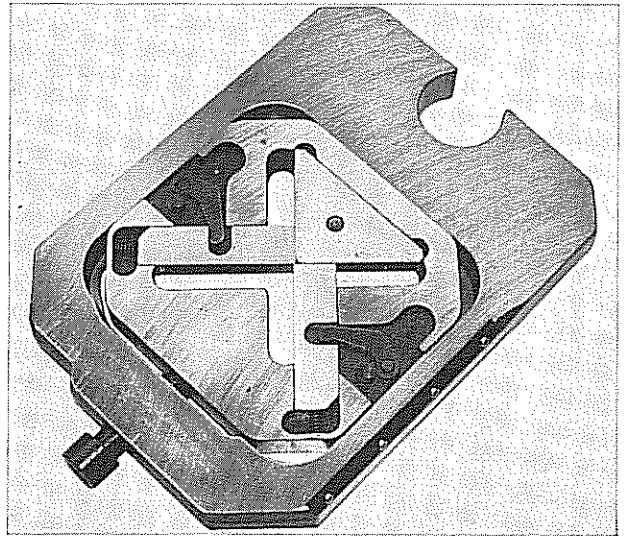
Rigid mounting of the movable section knife in the special section slide.
